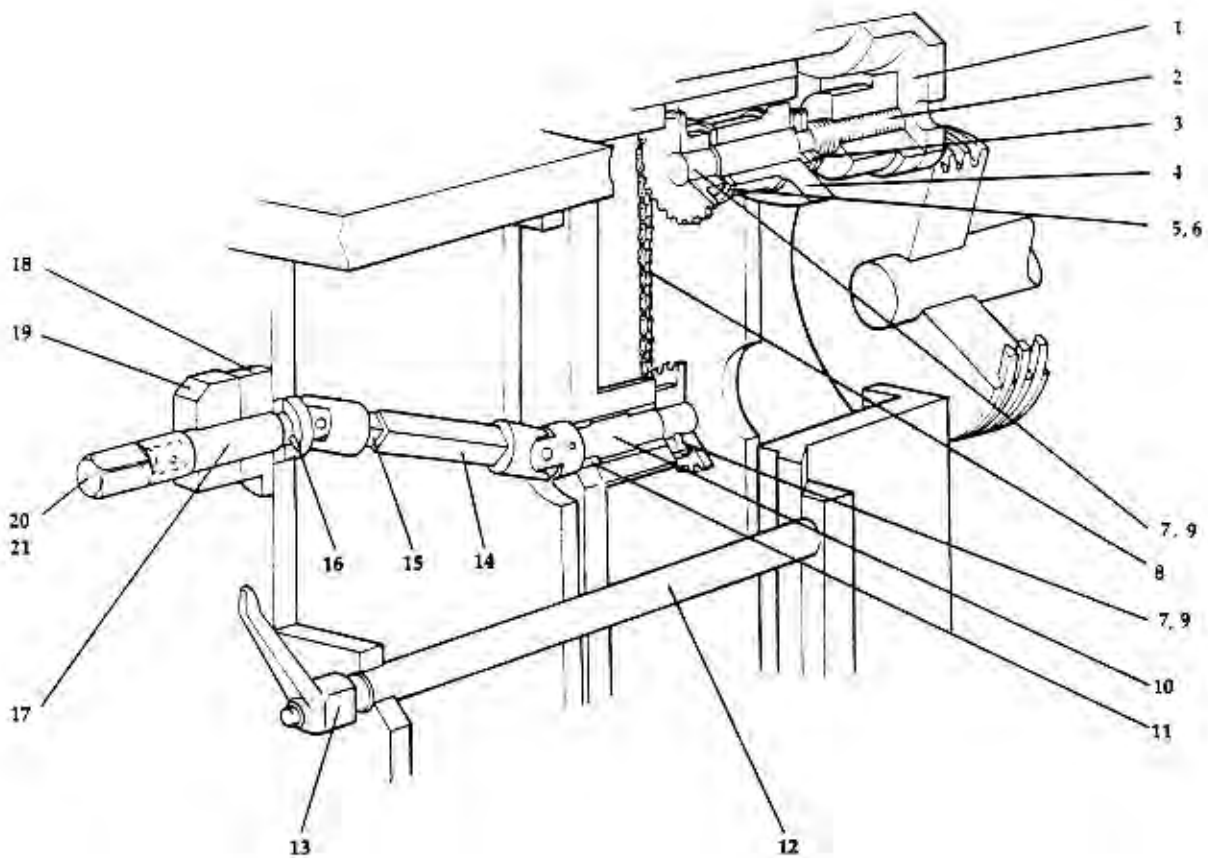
BOTTOM (EXCLUDING FIRST) AND TOP HEAD AXIAL ADJUSTMENT
